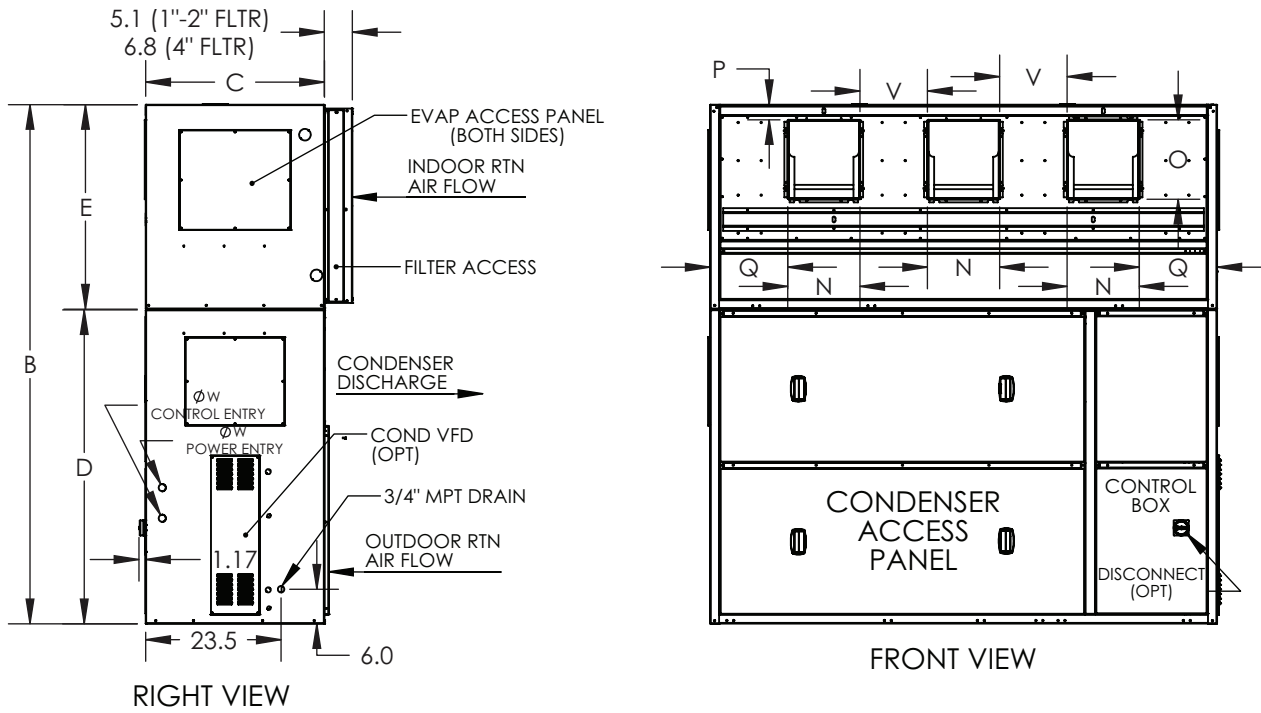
Base Unit Dimensions — 50XCA12,14 (Front Return, Horizontal Discharge)
